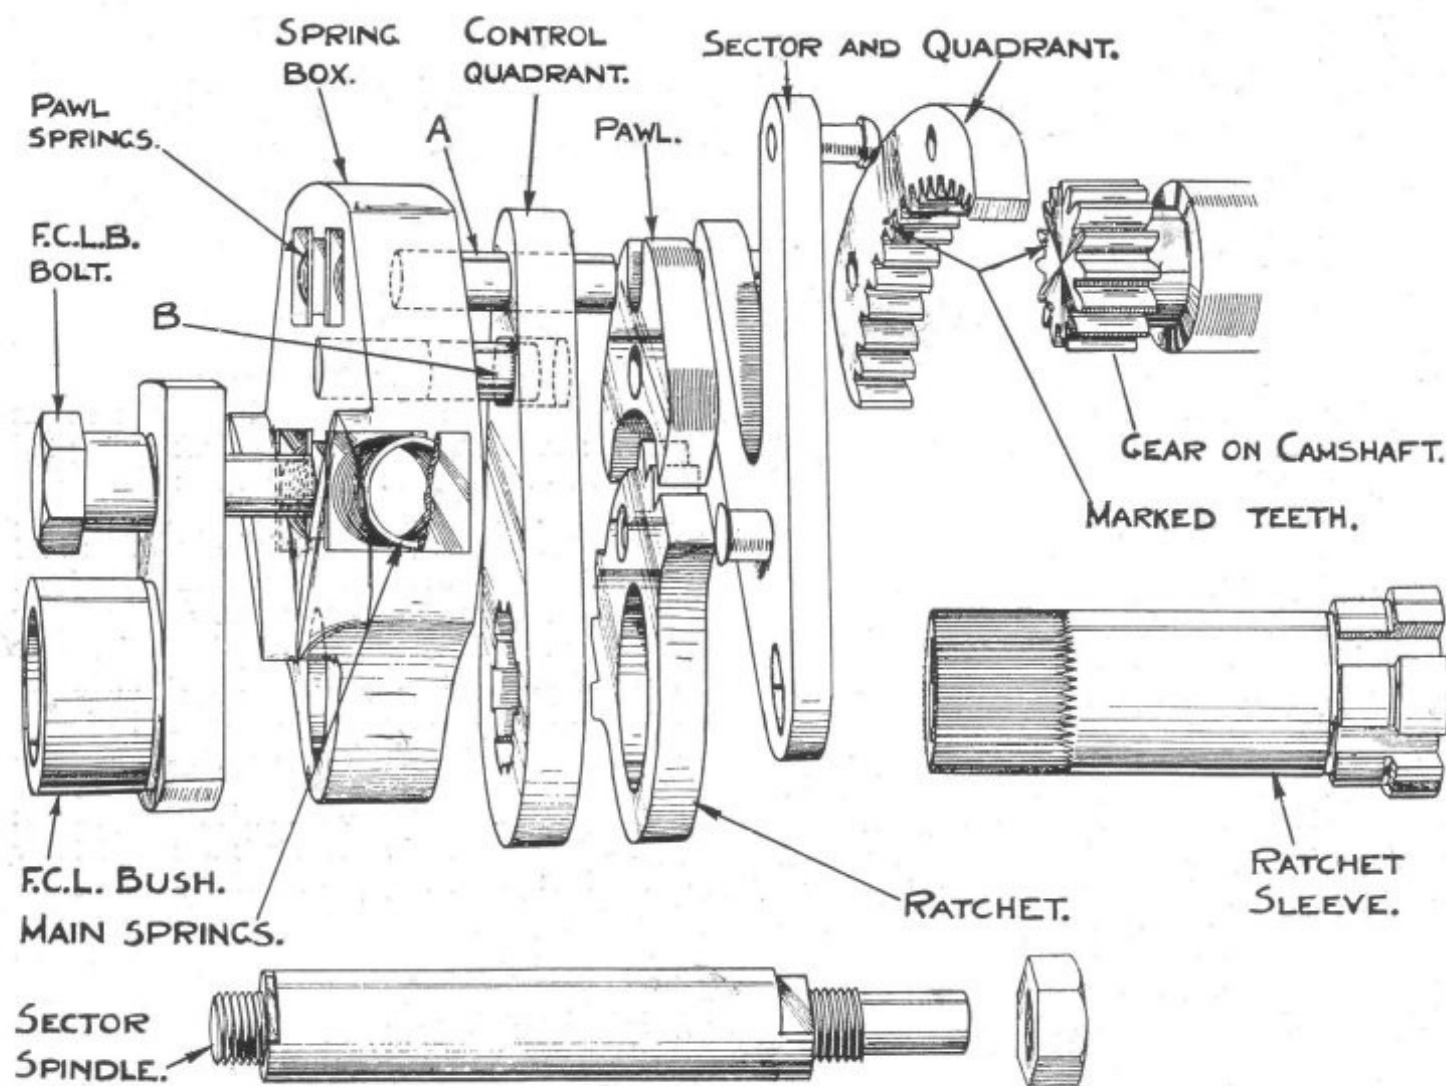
Exploded arrangement of Foot Gear Change Mechanism.
